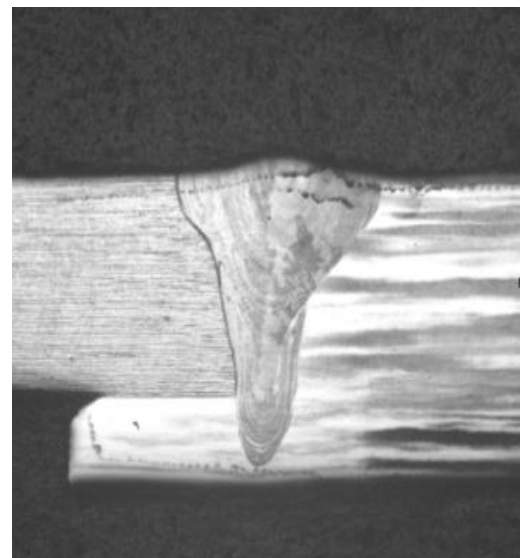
Micro structure of weld with weld speed 1000 rpm
